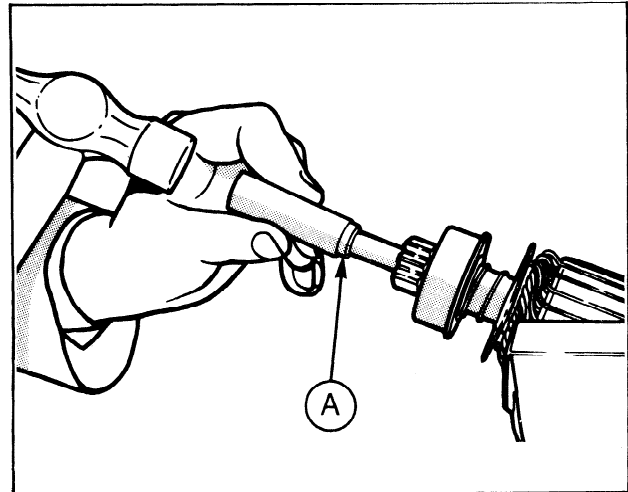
Using a Suitably Dimensioned Tube Separate Thrust Collar From "C" Clip Ring.
